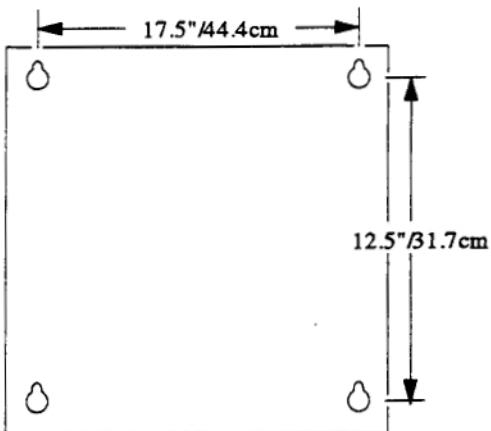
Turbo Superterm Cabinet Mounting Hole Dimensions
